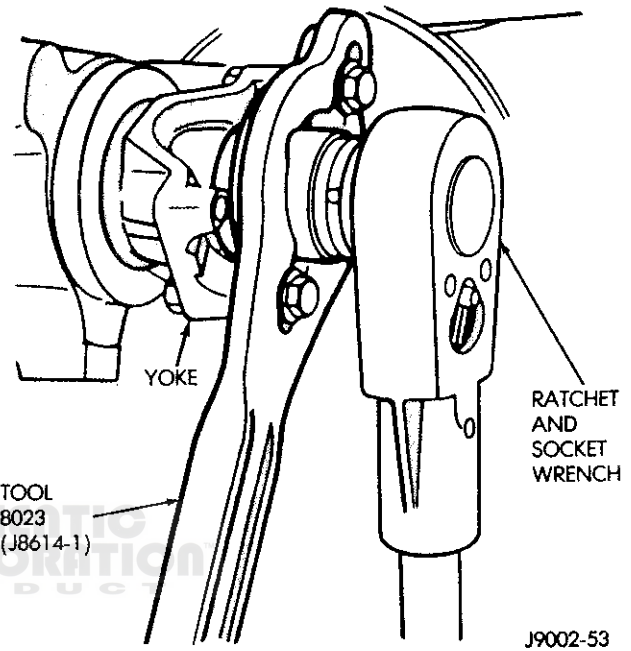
Pinion Shaft (Axle) Yoke Nut Removal
